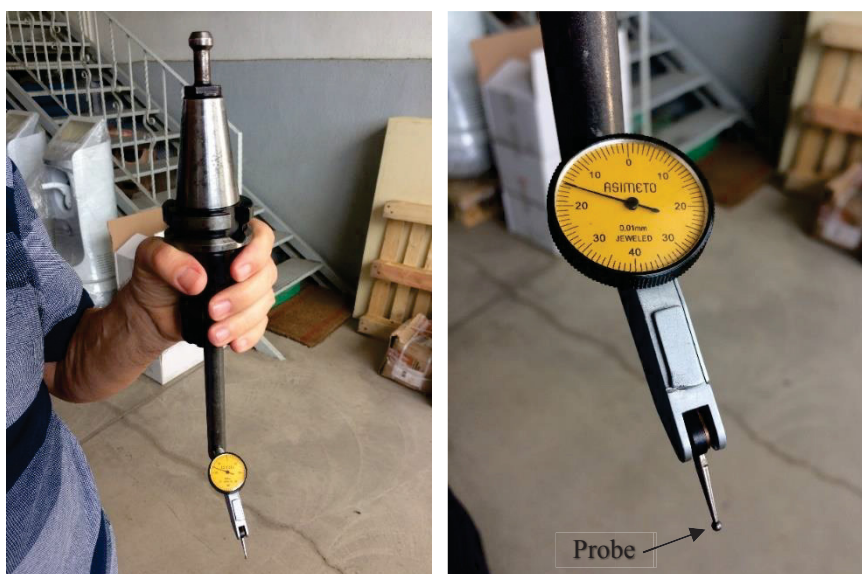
Dial indicator tool used along with the CNC milling machine
